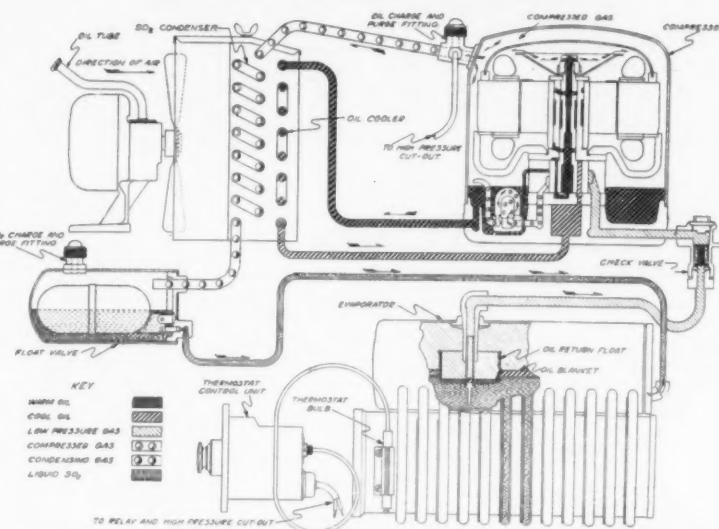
Gas and oil chart of the Electro-Sealed machines (dome welded to base of compressor). Air circulation has been improved by bringing cool air first over the fan motor, thus keeping the fan motor cooler.
